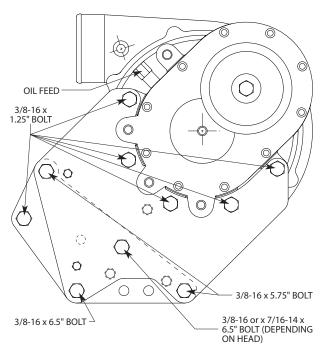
c / Driver side supercharger mount. ('64-'68 Mustang)
